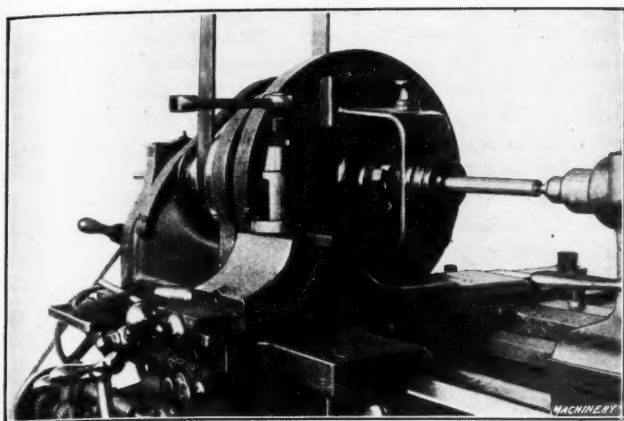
Application of Bemis Auxiliary Head to Lathe Work
